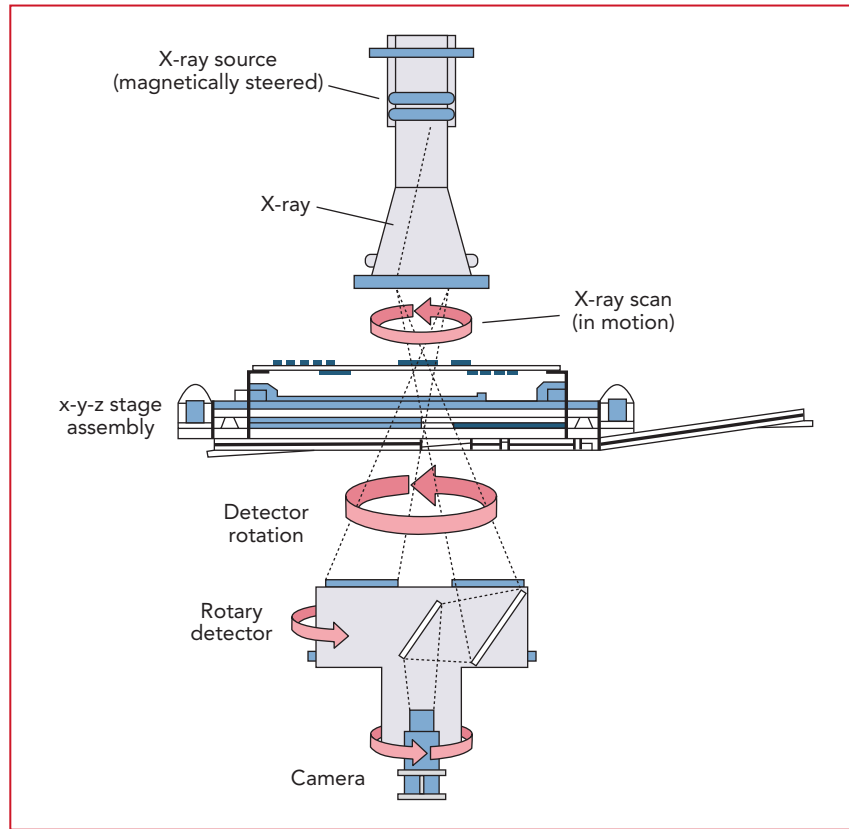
A controlled x-ray beam and a rotating detector acquire several images of an area of interest on a PCB. Software combines the images to show solder joints on only one side of a PCB.
